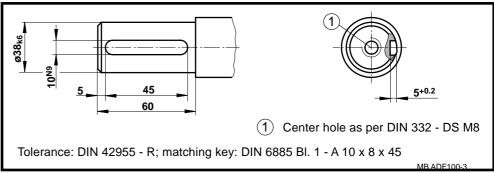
Main spindle motor ADF 100 - output shaft with key
